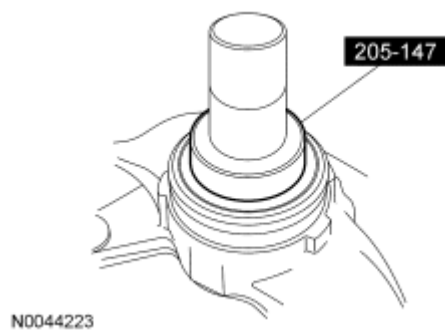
Pressing Wheel Bearing Into Wheel Knuckle Using Special Tool (205-147)
